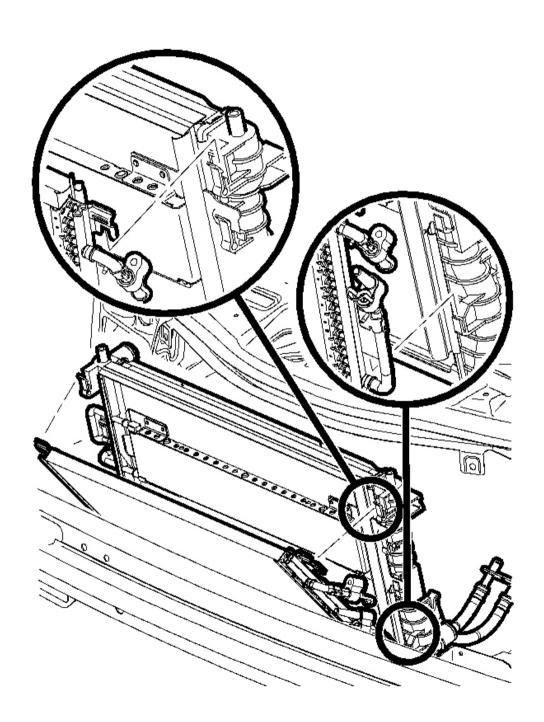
View Of Condenser To The Radiator Courtesy of GENERAL MOTORS CORP.
